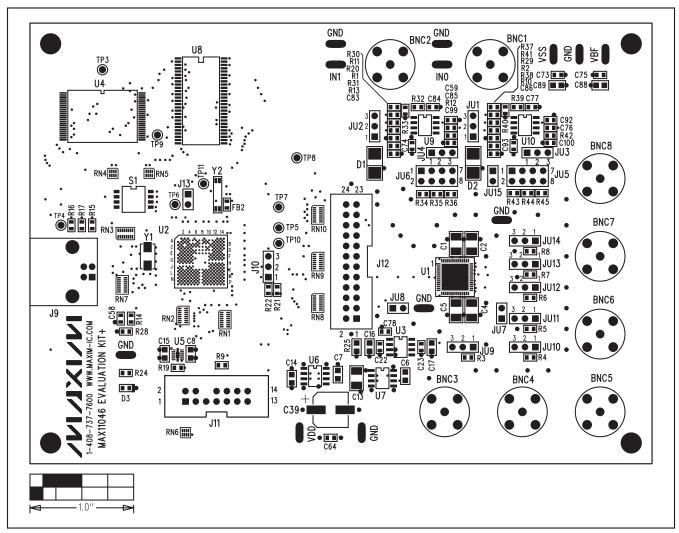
MAX11046 EV Kit Component Placement—Component Side
